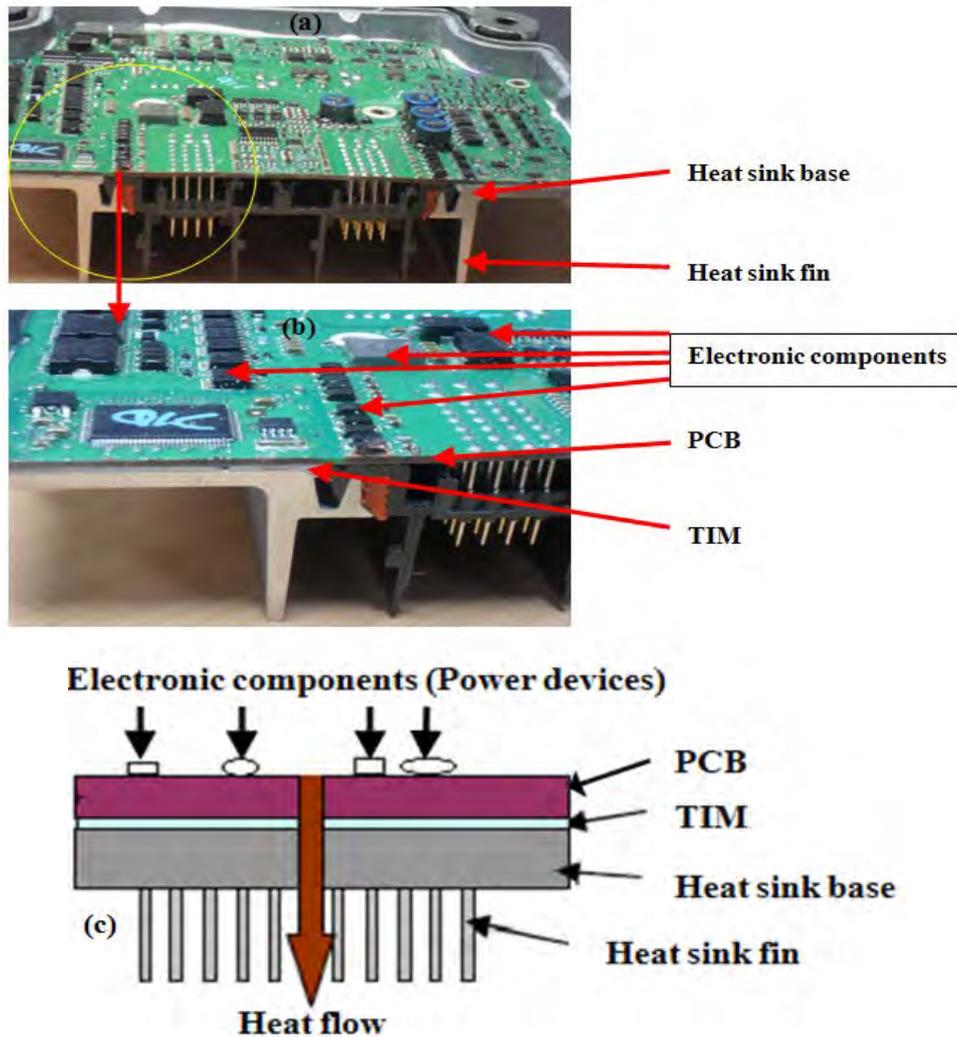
Packaging materials in typical power module package (system-level) (a) showing ECU heat sink base and heat sink fin (b) showing TIM, PCB and electronic components (c) schematic diagram of ECU showing heat flow path
